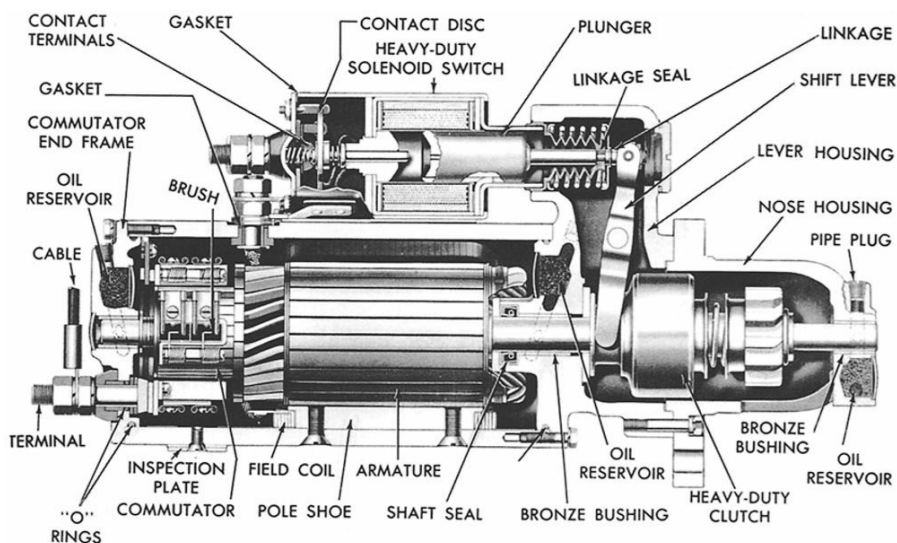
B. A pre-engaged starter motor with a solenoid mounted on it.
